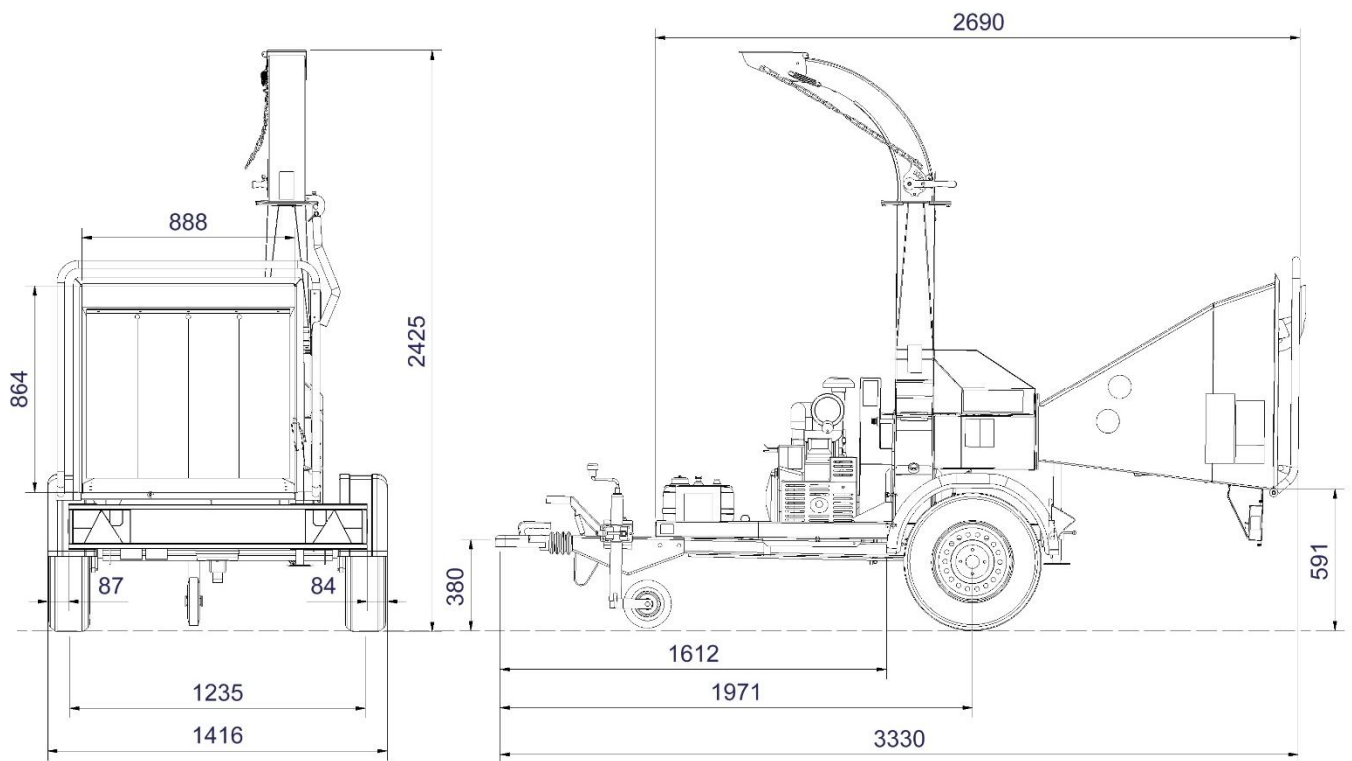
Dimensional drawing for TP 130 MOBILE with fixed funnel
